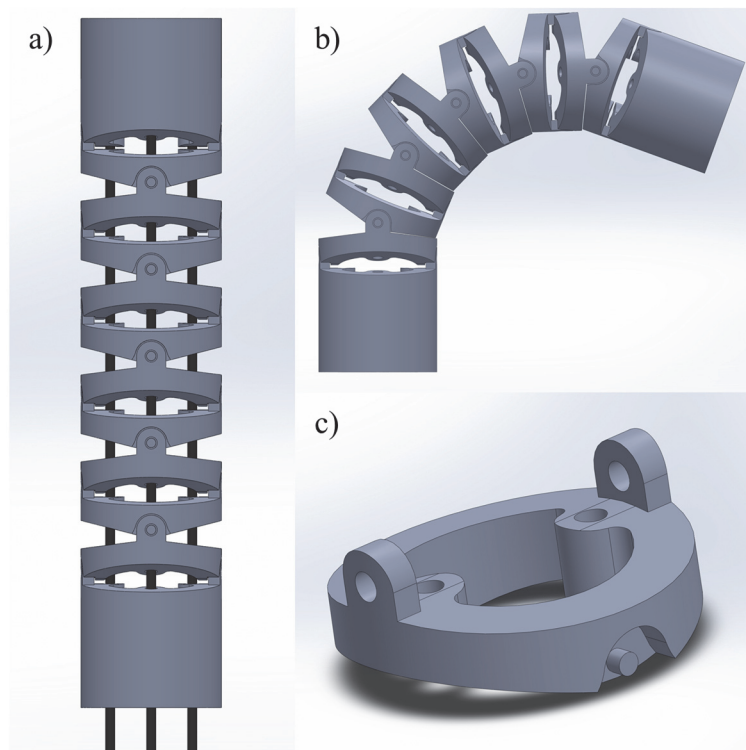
(a) Omnidirectional articulation assembly, consisting of stacked interleaved ring segments with four parallel pull-wires routed through lumens along the inner surface of each ring. The wires are fixed to the distal adapter component. When tension is applied to one of the pull wires, the opposite wire slackens, permitting bending along a direction, as shown in (b). An individual ring segment is illustrated in (c).
